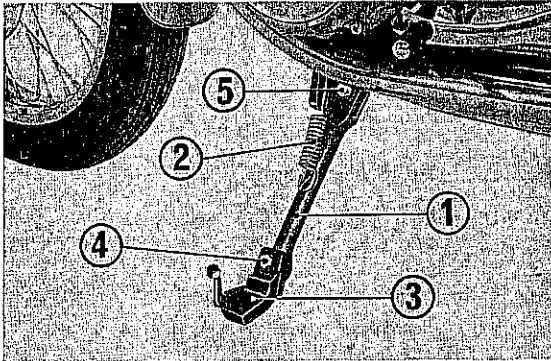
① Side stand bar ④ 6mm bolt
